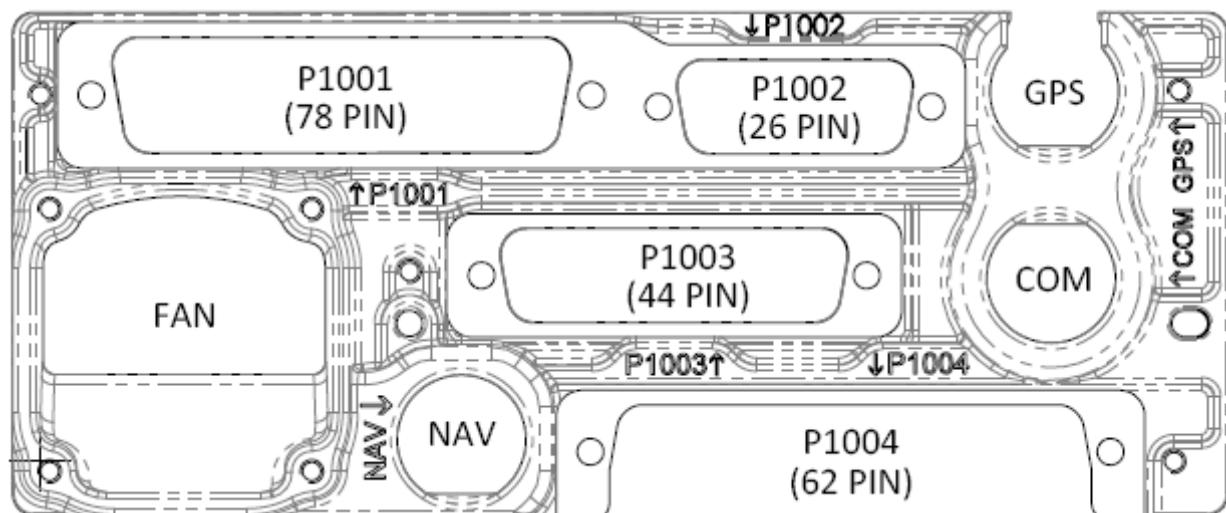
GTN 650 Connector Layout Detail - Rear View
